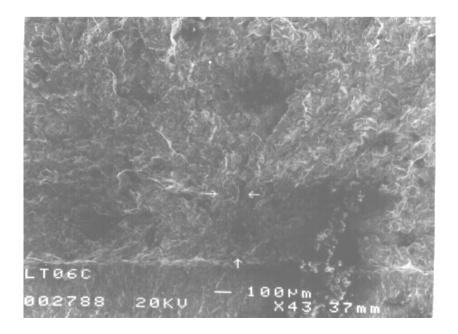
Fracture Surface– Specimen L-T 6
